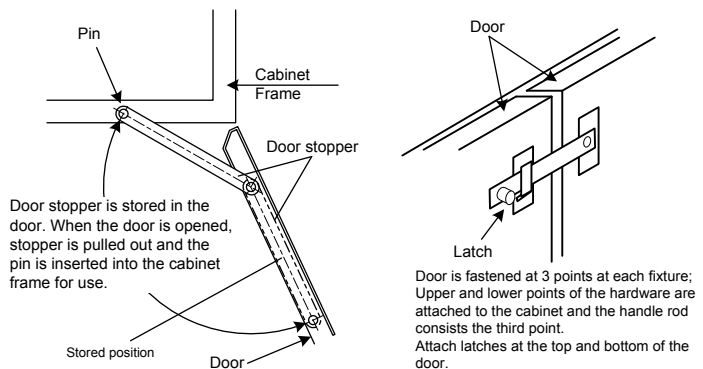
Example of countermeasure to prevent door opening and closing due to wind pressure
